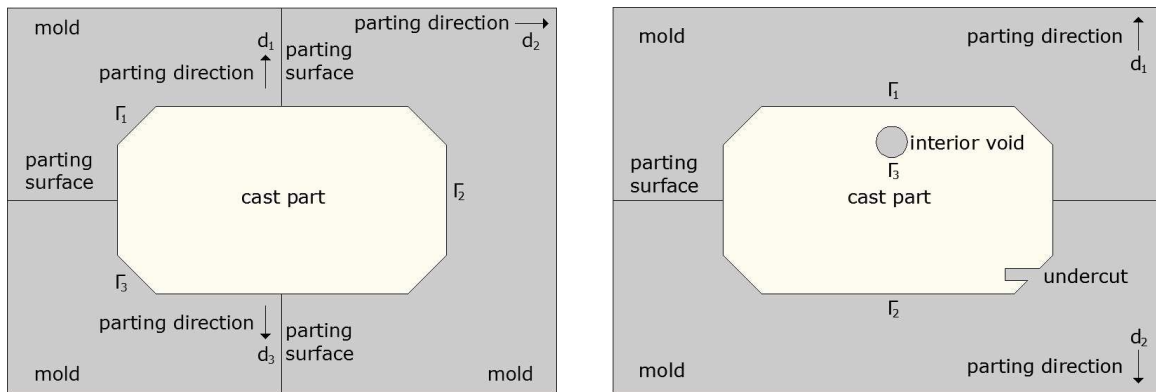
Left: moldable shape; right: non-moldable shape.
